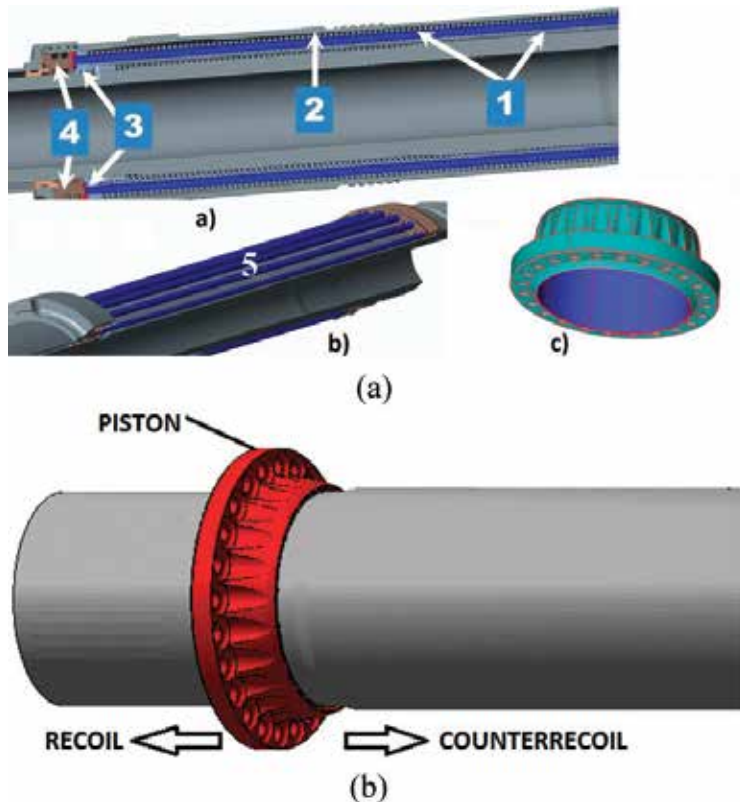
(a) General layout of the hydraulic brake: (a) general layout (1—hydraulic fluid cylinder with guides and springs, 2—case, 3—piston, 4—packings); (b) general layout without case (5—guides); and (c) piston; (b) schematic of operation.
